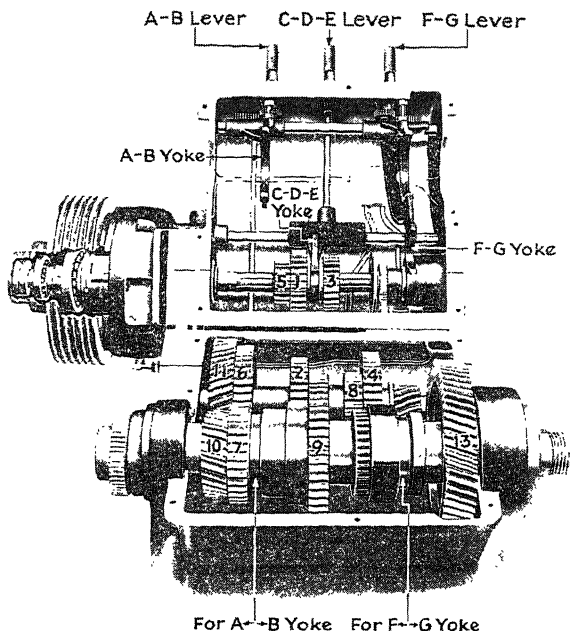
Geared head for lathe. Twelve spindle speeds are provided. For lever arrangements and gear runs see Fig. 42. (Courtesy of The American Tool Works Company.)
